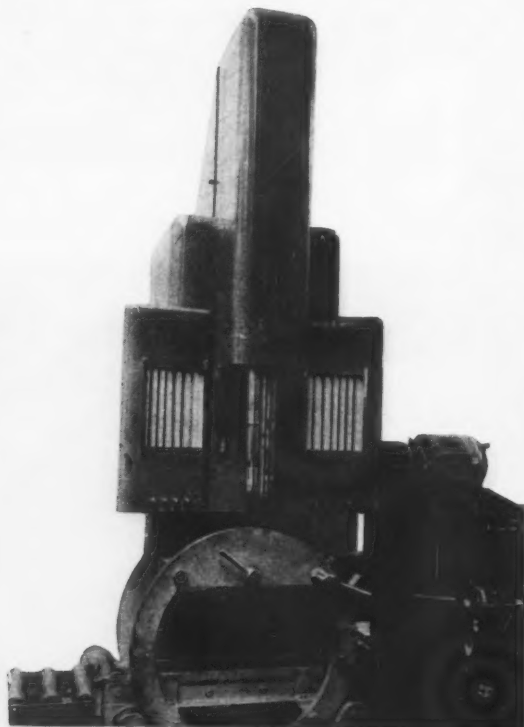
Grinding caliper gauge used for sizing during grinding operation. The machine is stopped automatically when size is reached.
